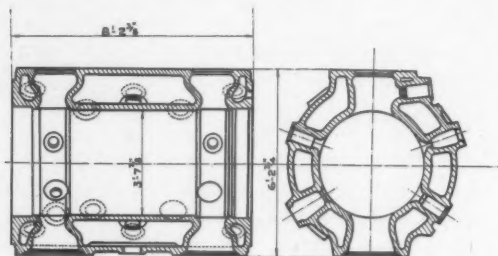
DRAWING OF GAS ENGINE CYLINDER SHOWING MAIN DIMENSIONS.
